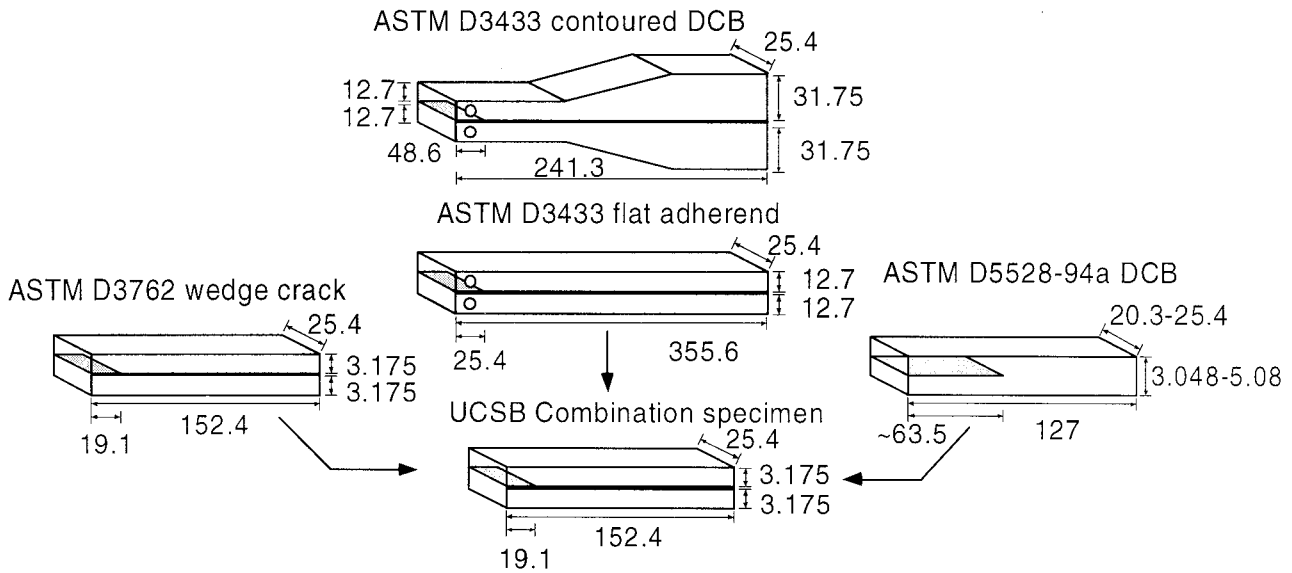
ASTM test specimens combined into one sample geometry. All dimensions are in mm.
